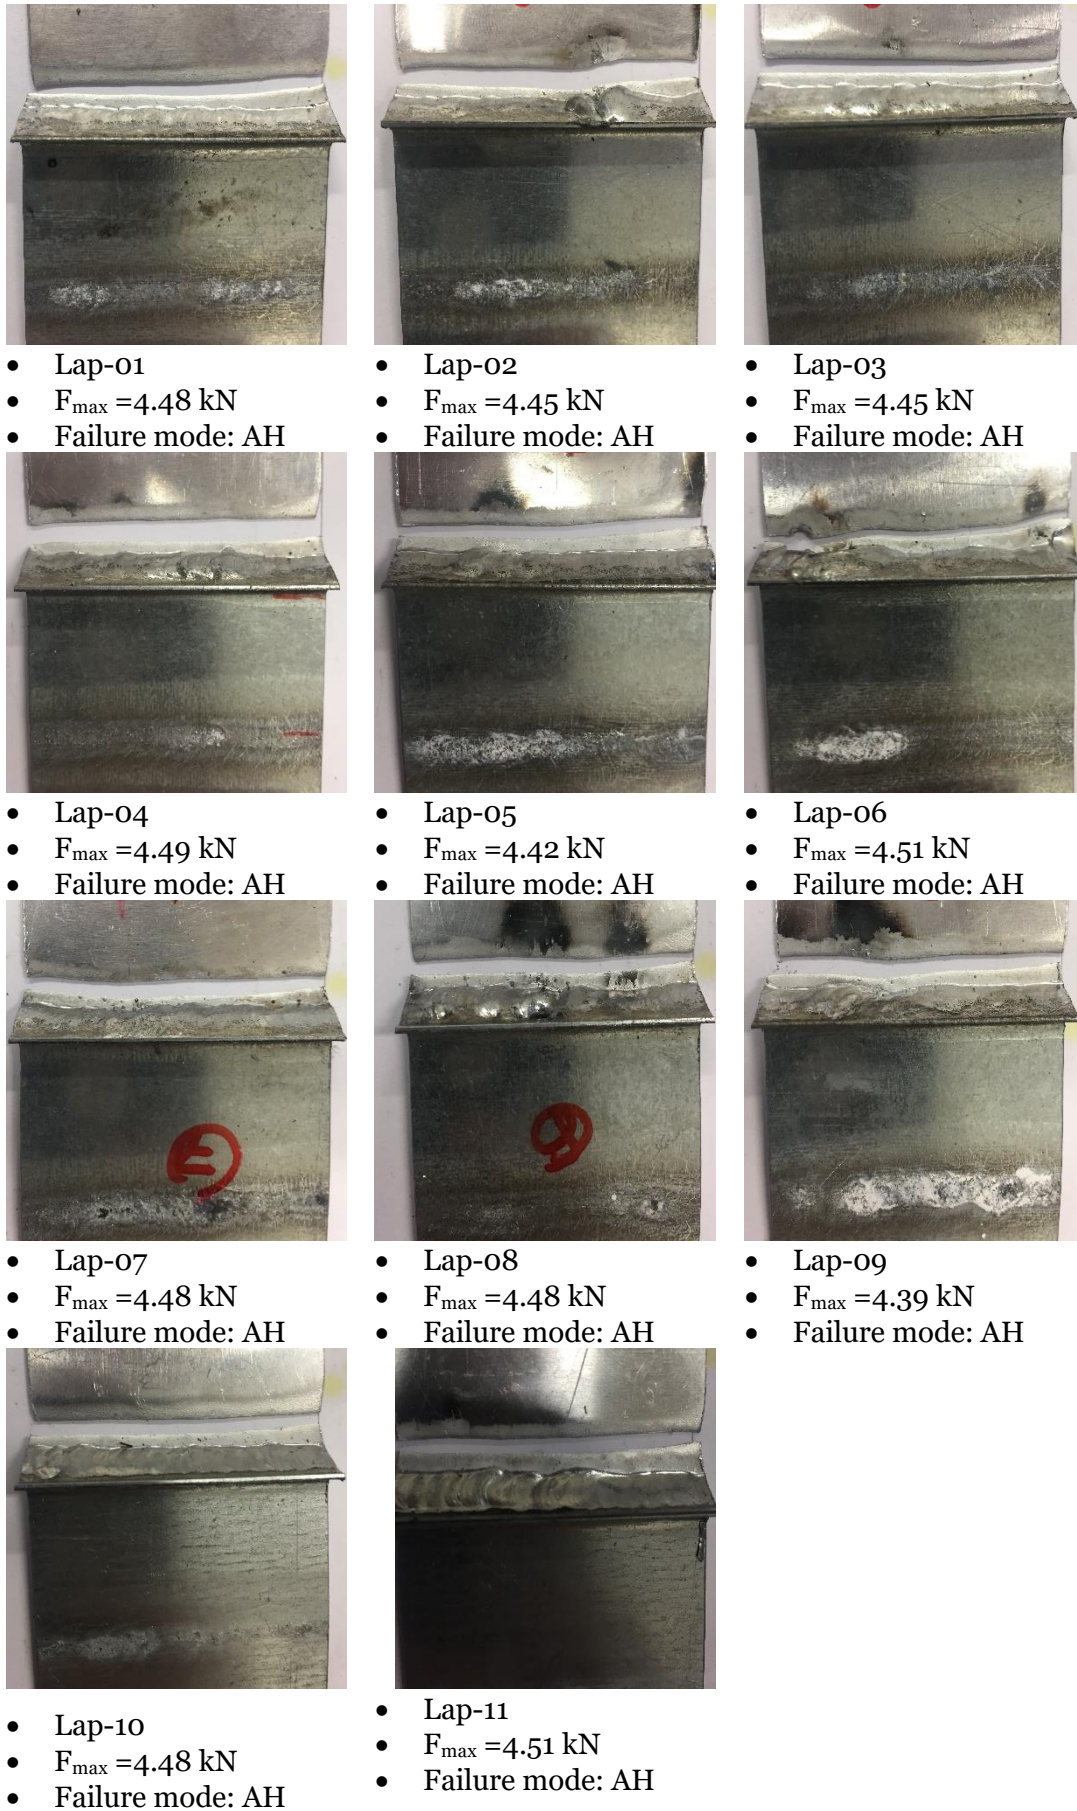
Tensile static failure of lap-welded joints (long-term).
